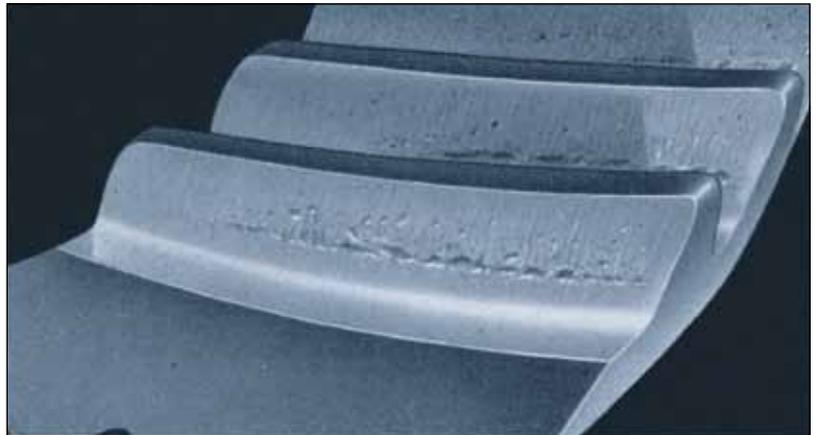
Pitch-line pitting on a spiral bevel gear surface.
